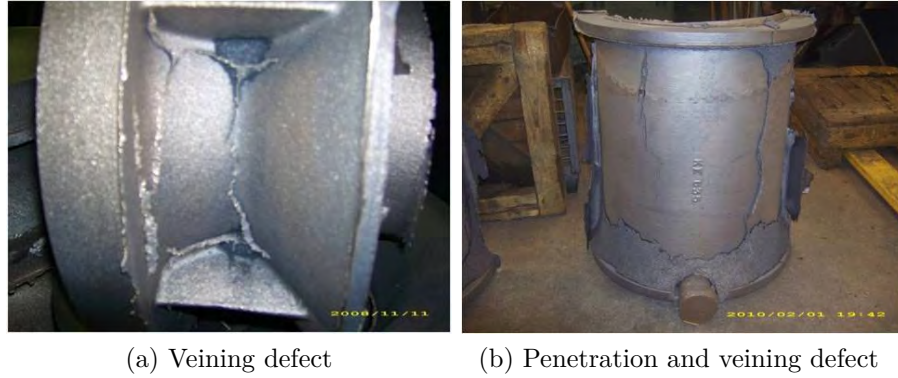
Some castings with defects after shot-blasting .
